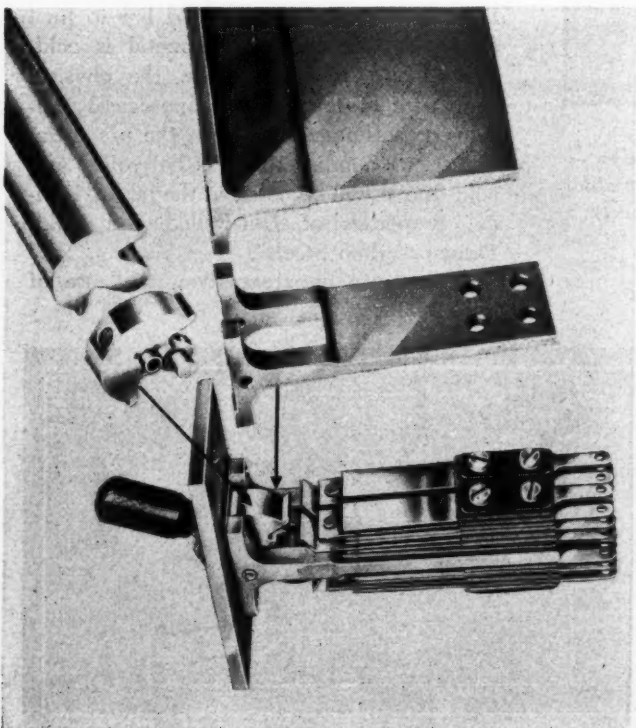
Contact base of Fig. 2 is shown here (arrow) in position on final assembly of locomotive controller
